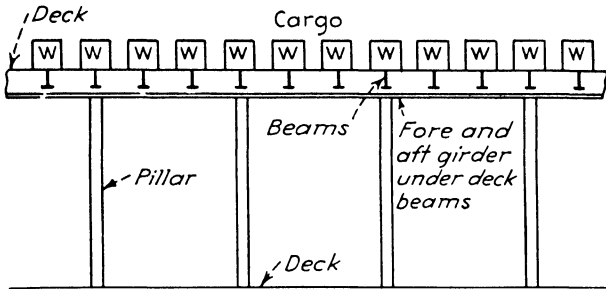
A.—Section through centerline girder under deck beams. This girder reduces the span of the beams passing over it.
